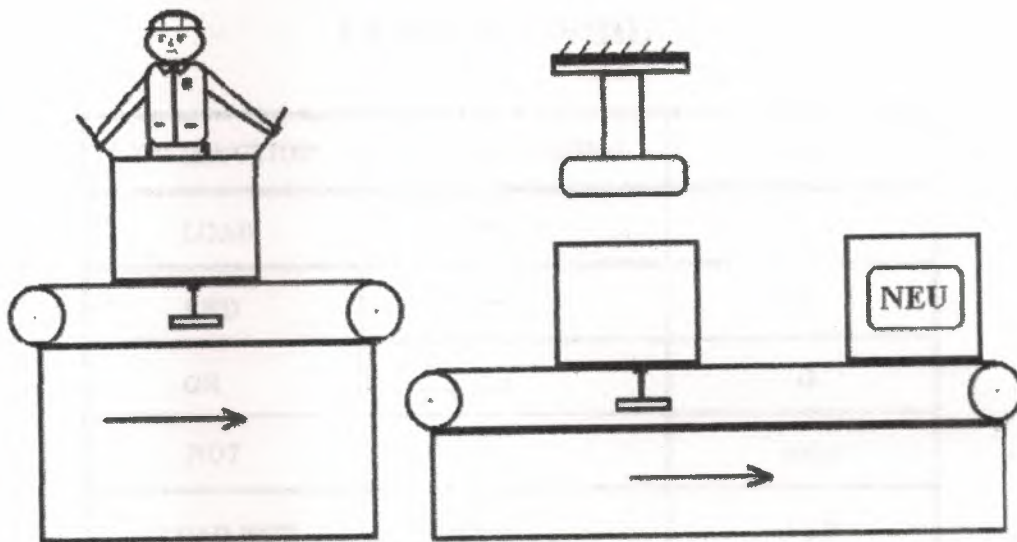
Carrying Conveyor and Stamping & Stabling Unit
